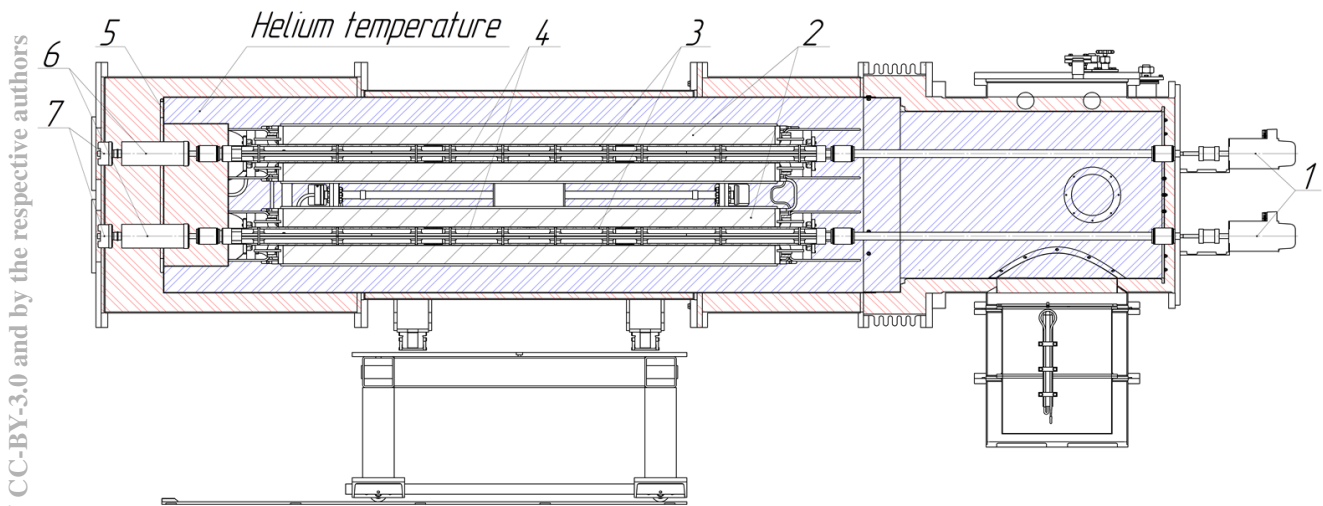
Layout of equipment for cold MM: 1. Servomotor, 2. Magnet, 3. Measurement shaft, 4. PCB, 5. Nitrogen-screen, 6. Slip rings, 7. Angular encoder.
